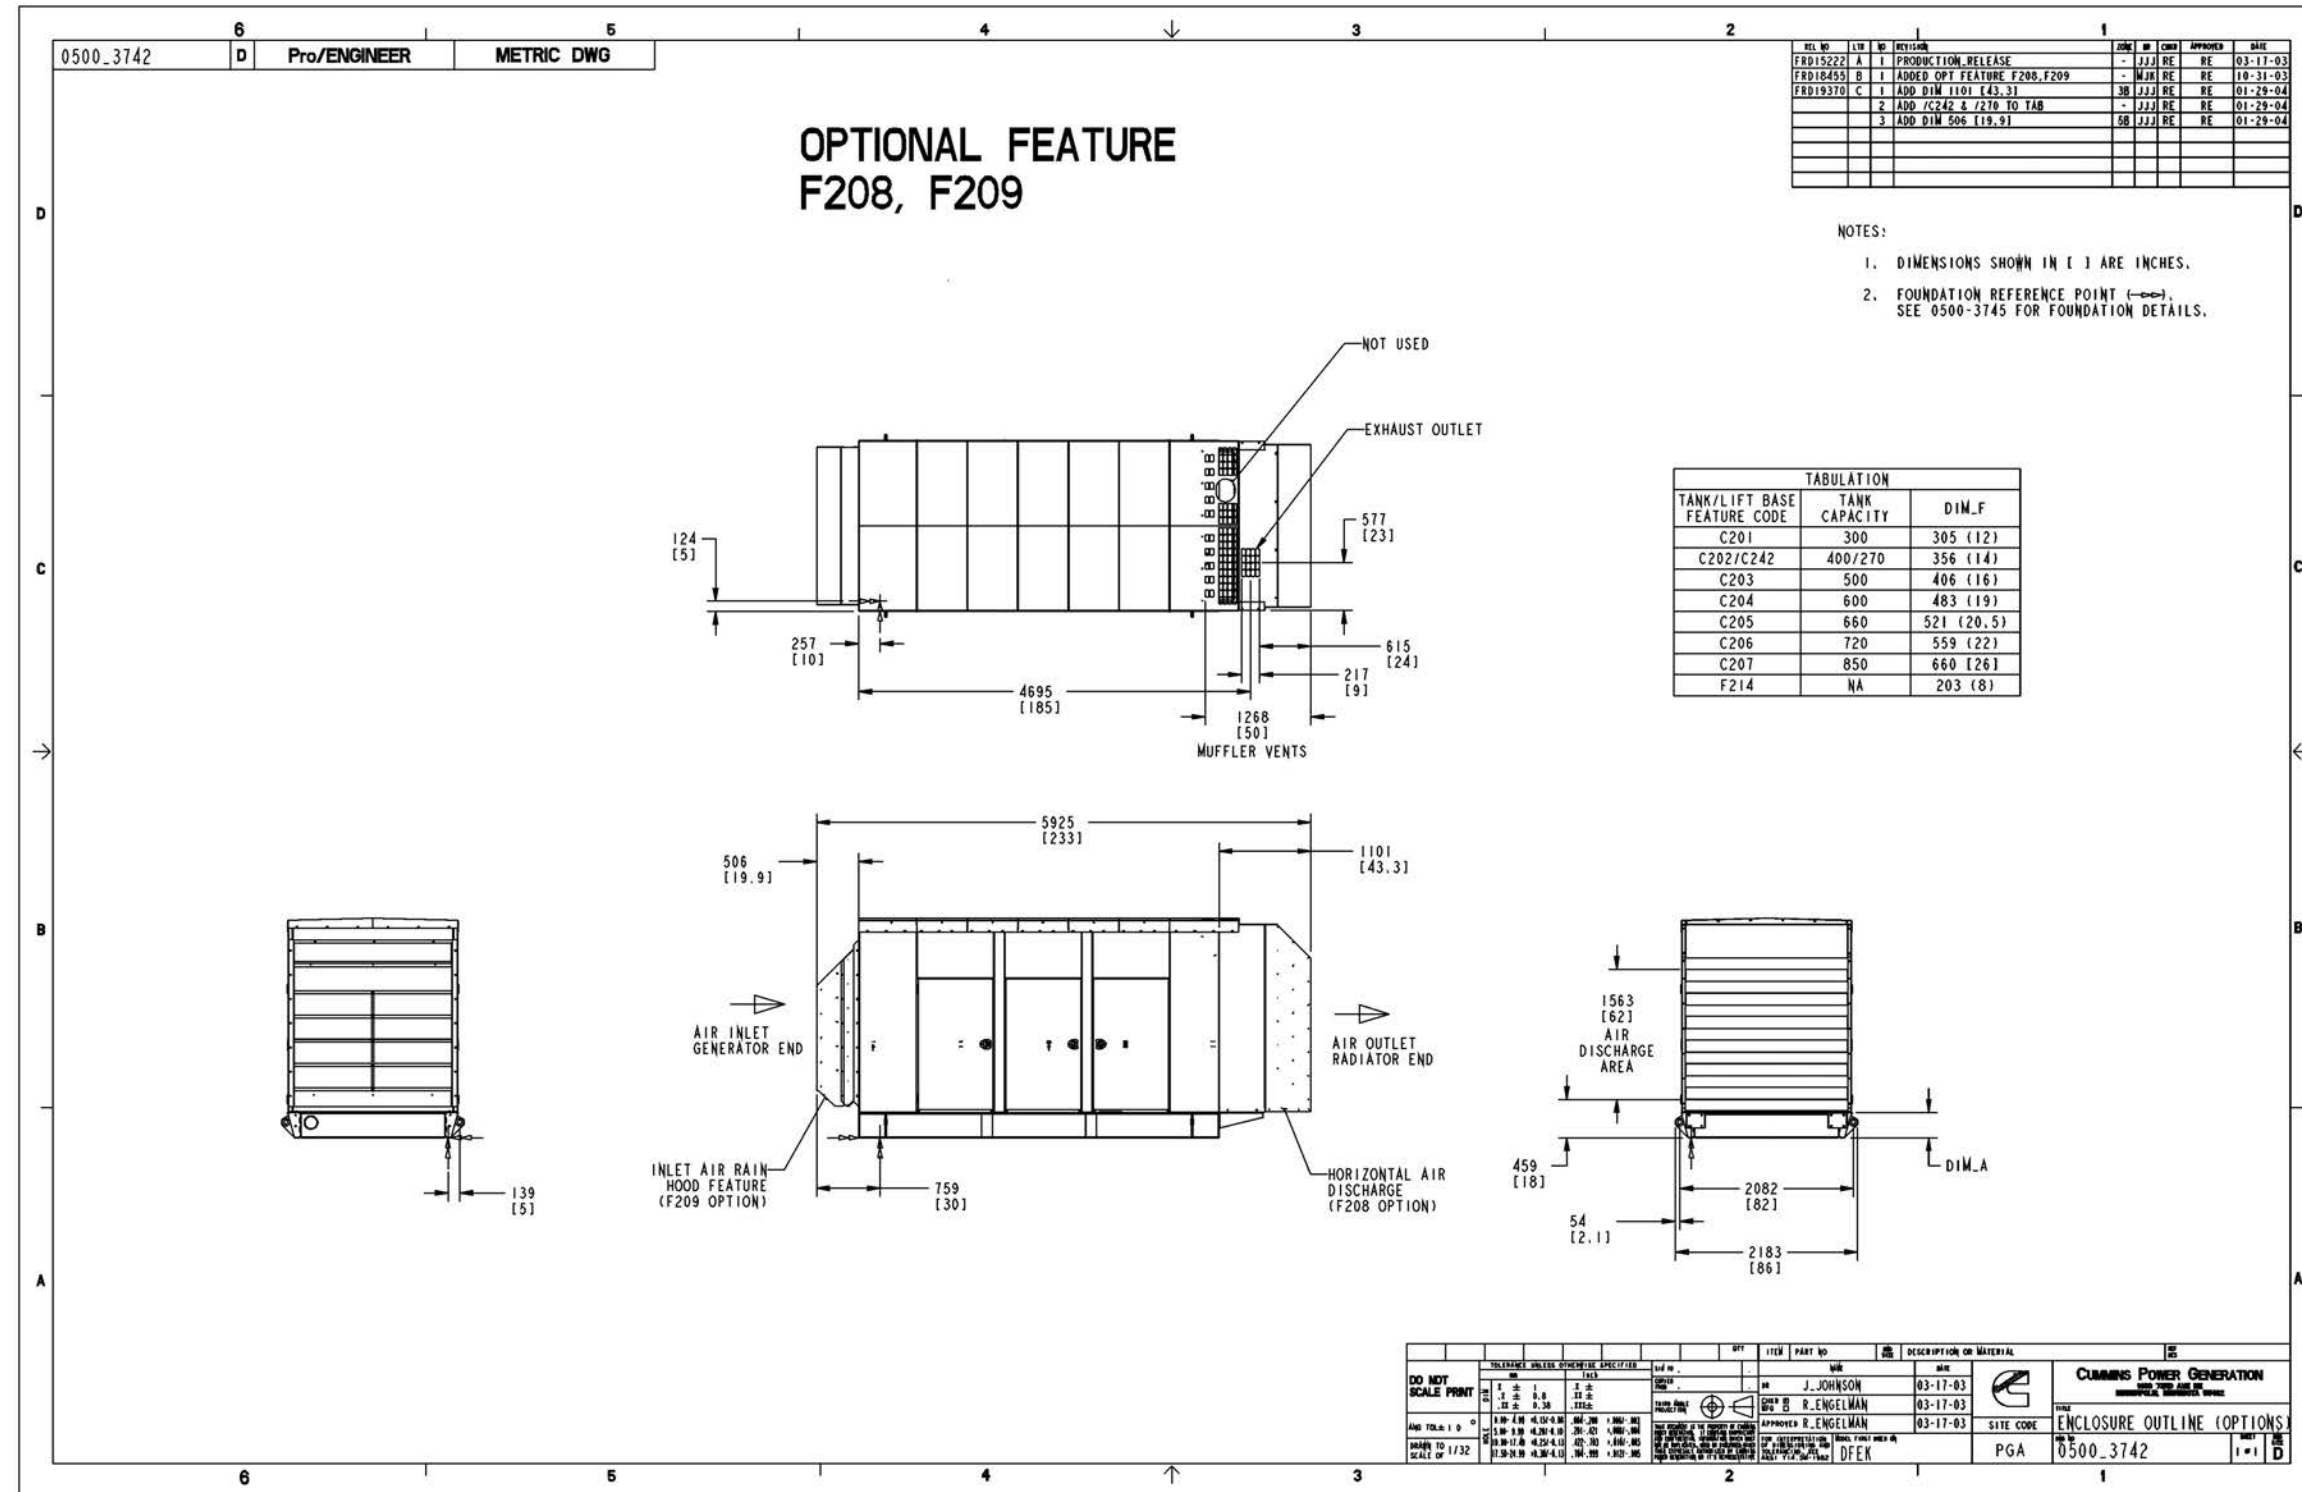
ENCLOSURE OUTLINE DRAWING (F208, F209) (SHEET 1 OF 1)
